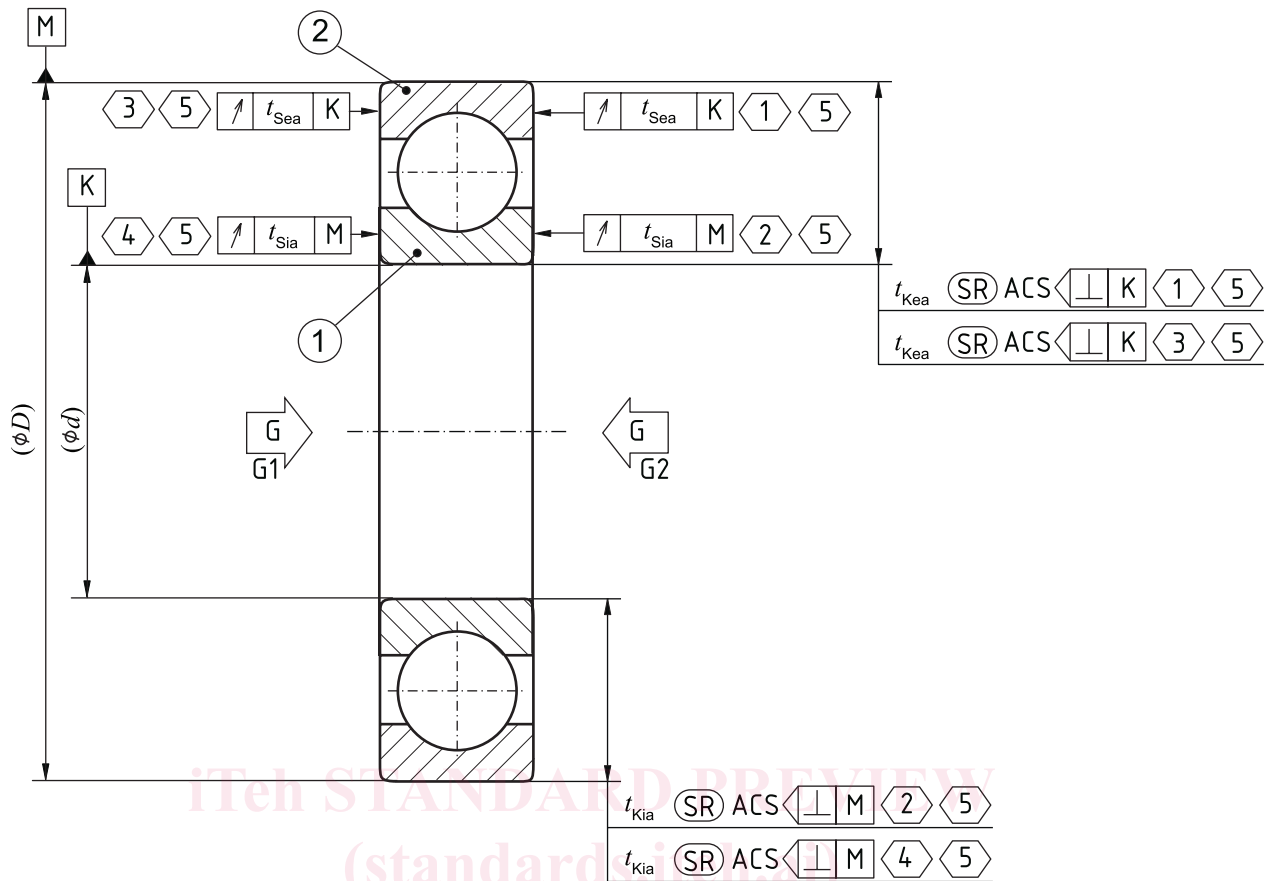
Geometrical tolerances for single components of bearing with cylindrical bore
